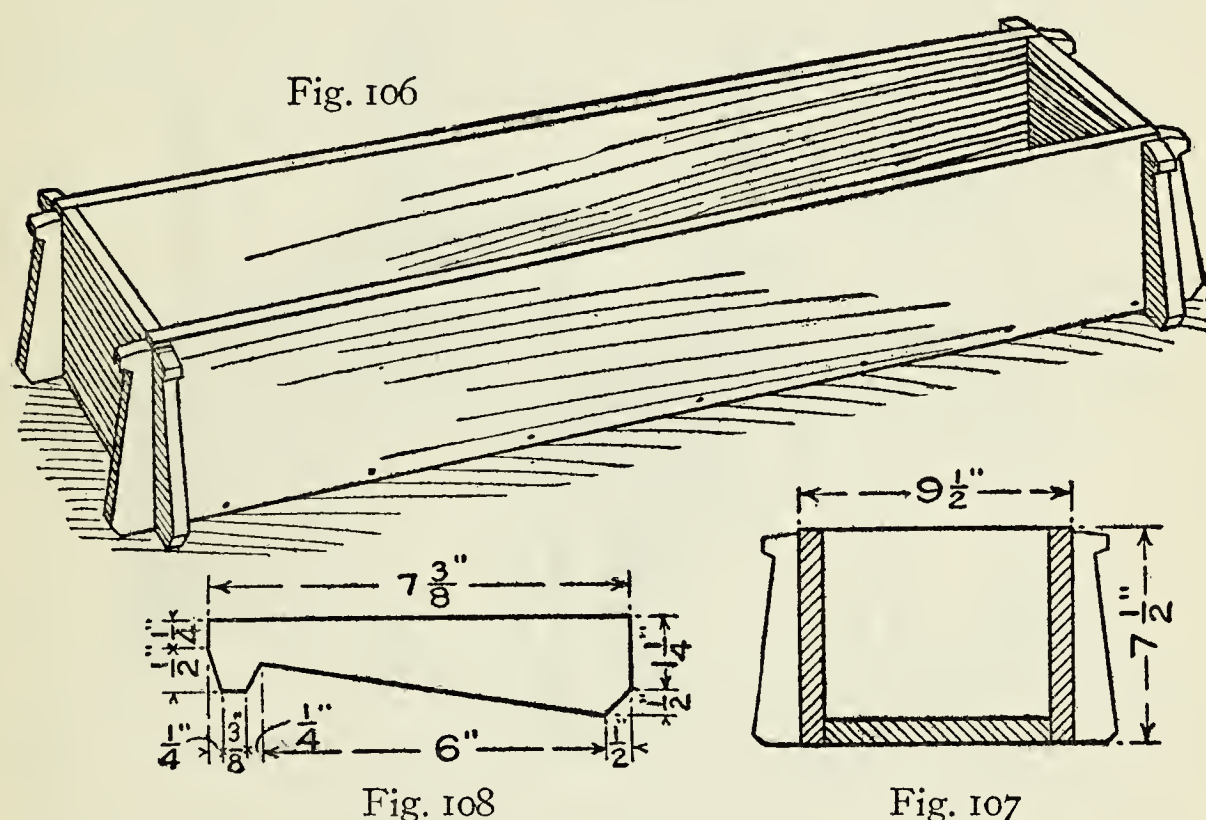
A PLANT BOX FOR WINDOW OR BALUSTRADE
